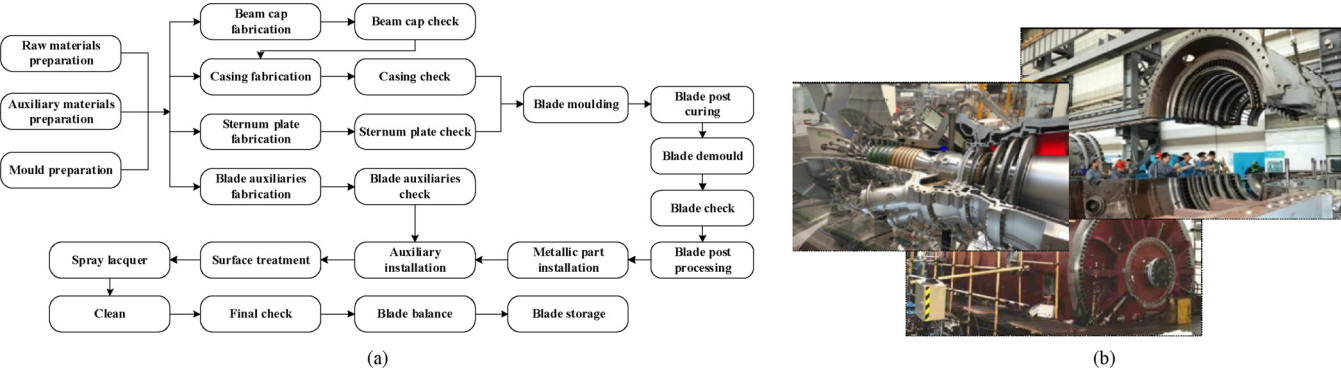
(a) Operations of the impeller blade; (b) Assembly of the turbine.
